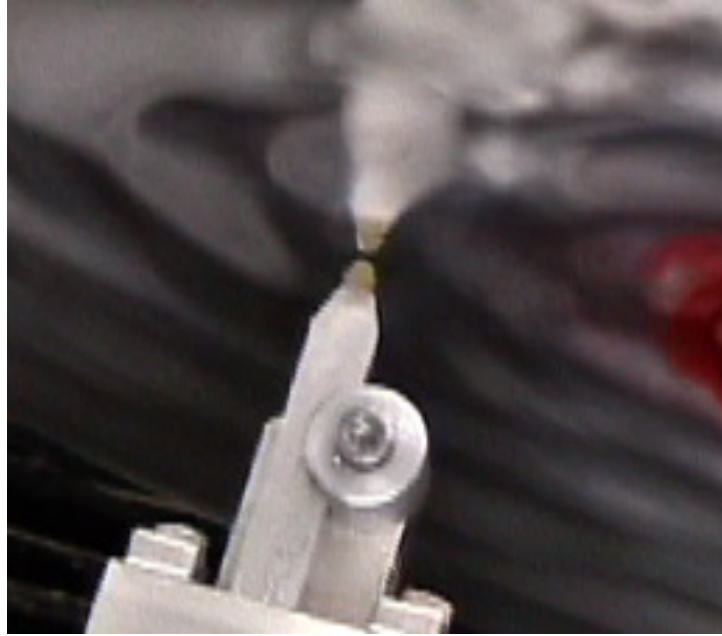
Slow tool servo cutting of the mold for a large lighting component. The tool moves in coordination with the spindle motion to trace out the “waves” on the surface.
